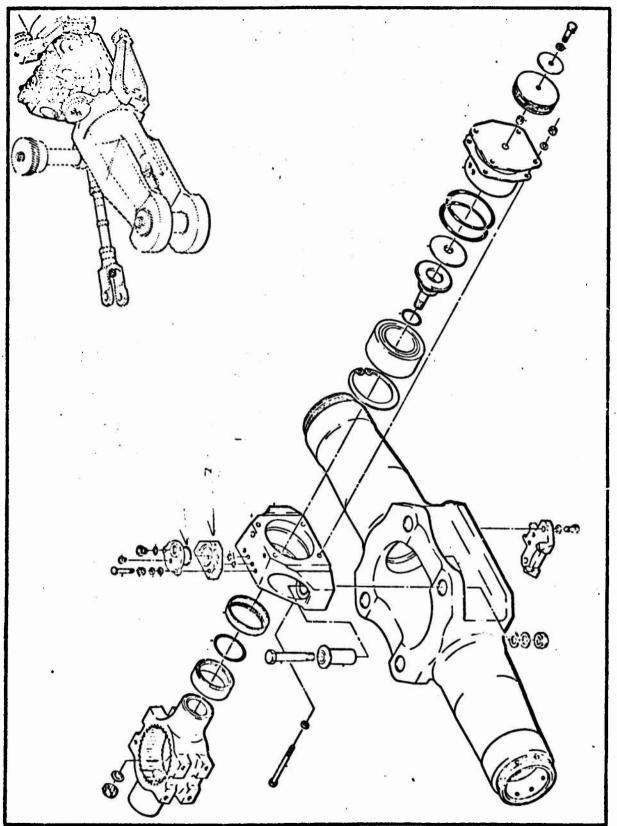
Hub Assembly, Main Rotor, Inboard Section
